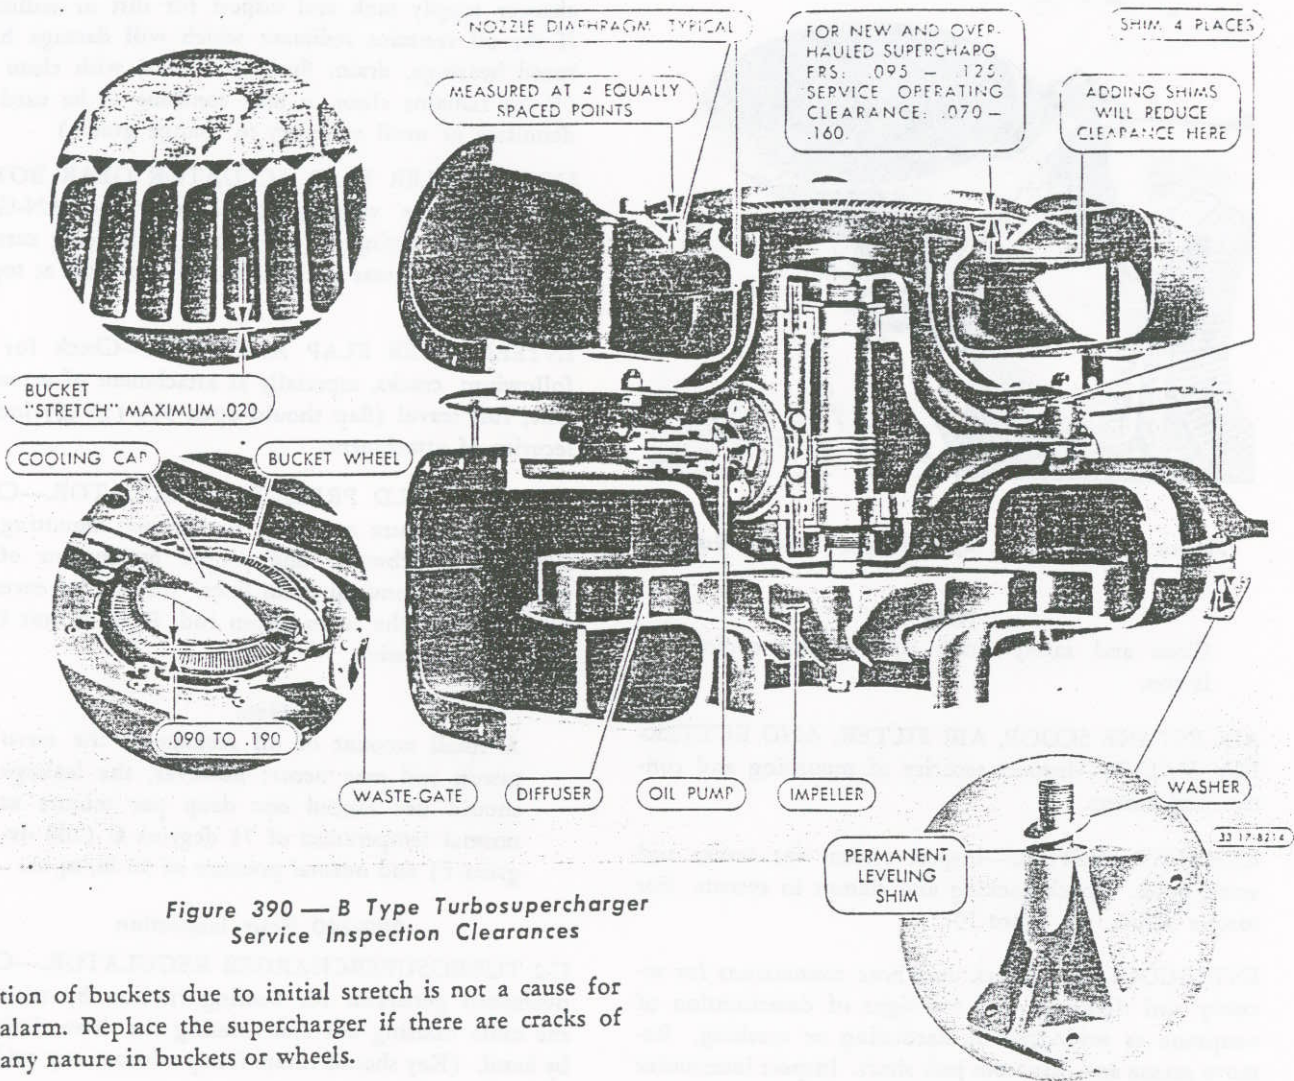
B Type Turbosupercharger Service Inspection Clearances
